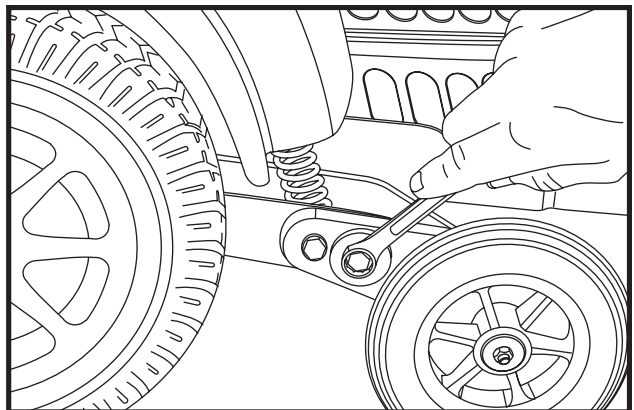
Anti-Tip Wheel Adjustment (Cam)
